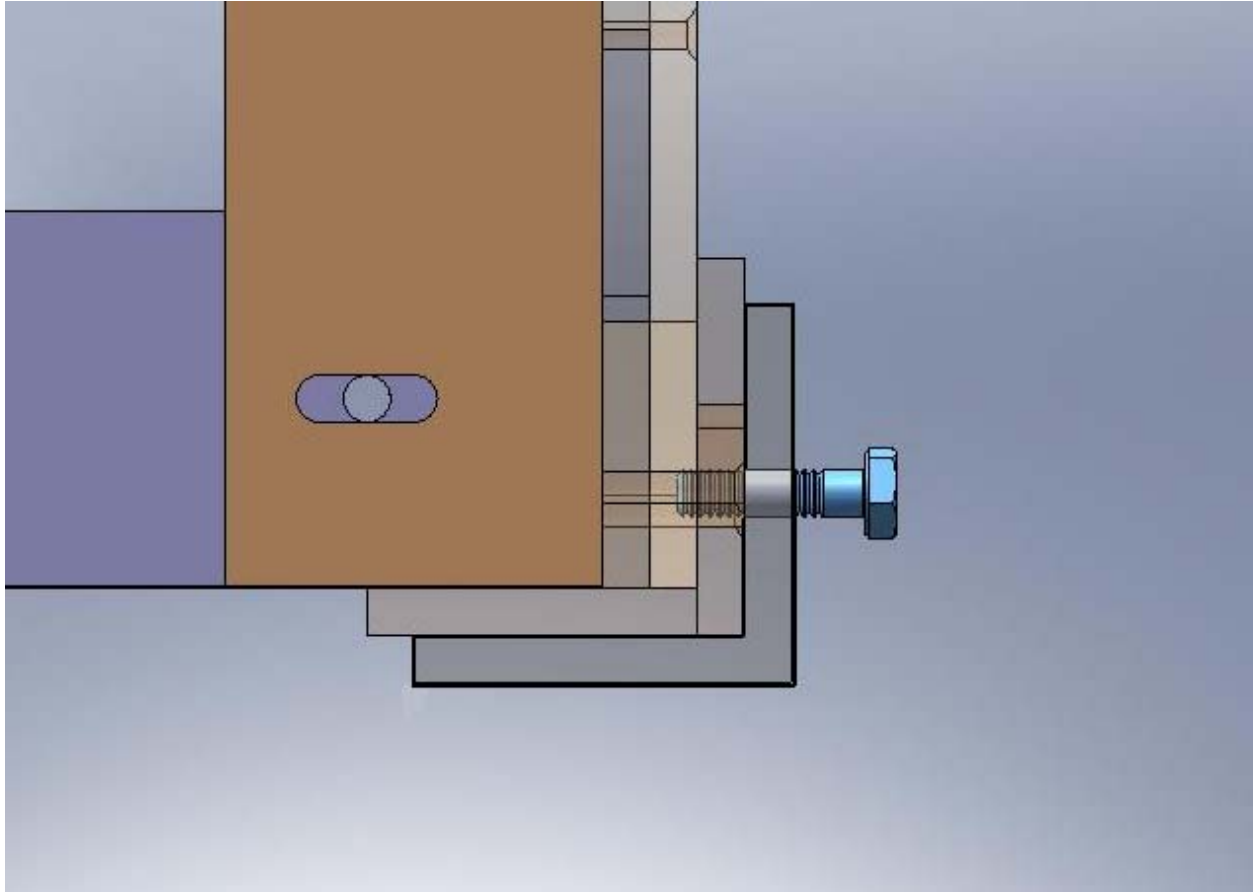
View of one of the ends of the sliding assembly attached with a bolt to the fixed rail. The fixed rail has the thicker border
